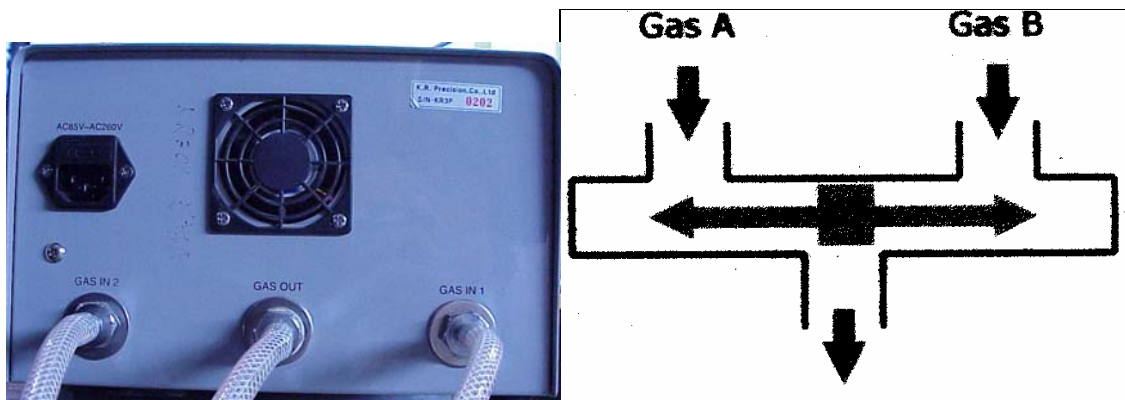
Left: Gas PulserTM rear view showing the inputs and outputs for the shielding gases. Right: Schematic of the gas pulsing switching mechanism.
